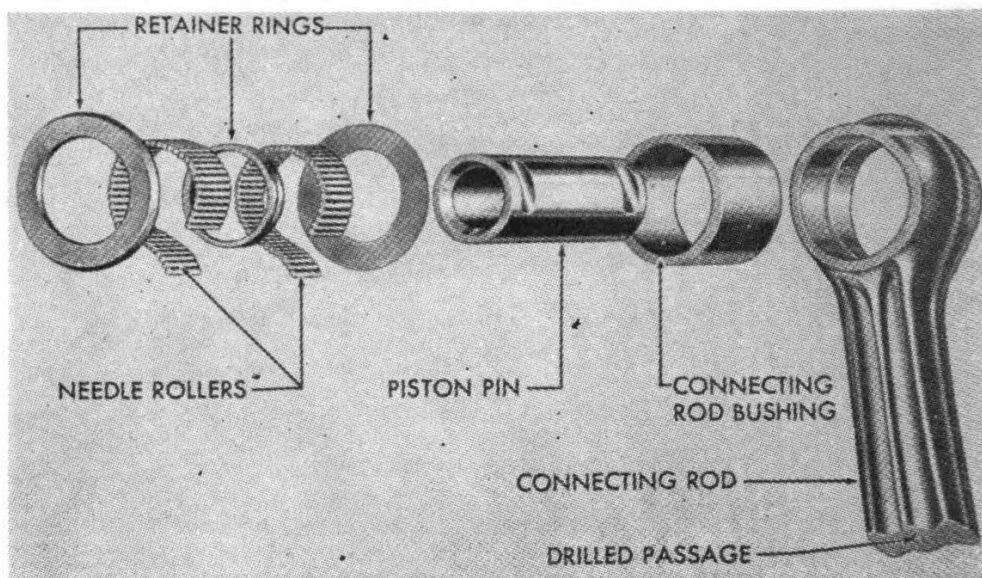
Needle type piston-pin connecting-rod bearing assembly.
